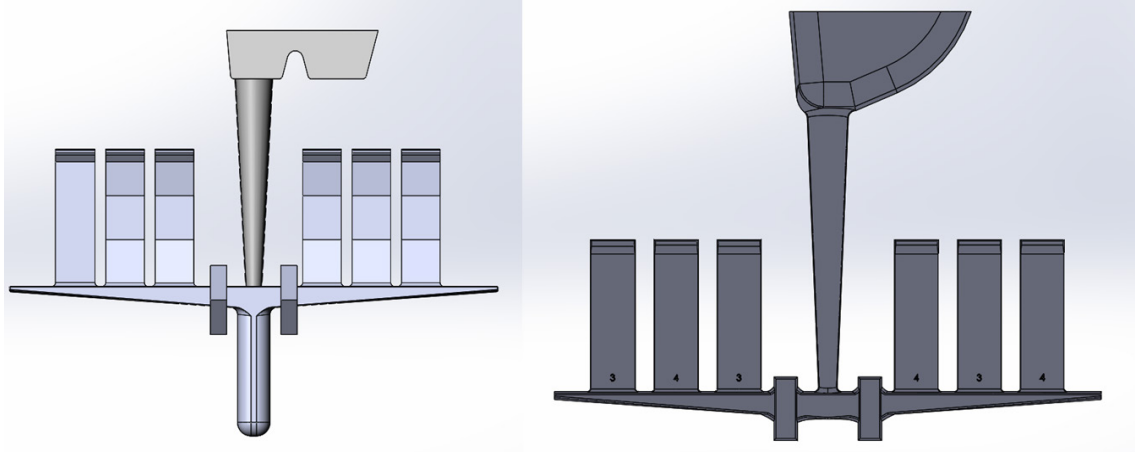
Finger mold base design and final 3-4 mm finger mold final design
